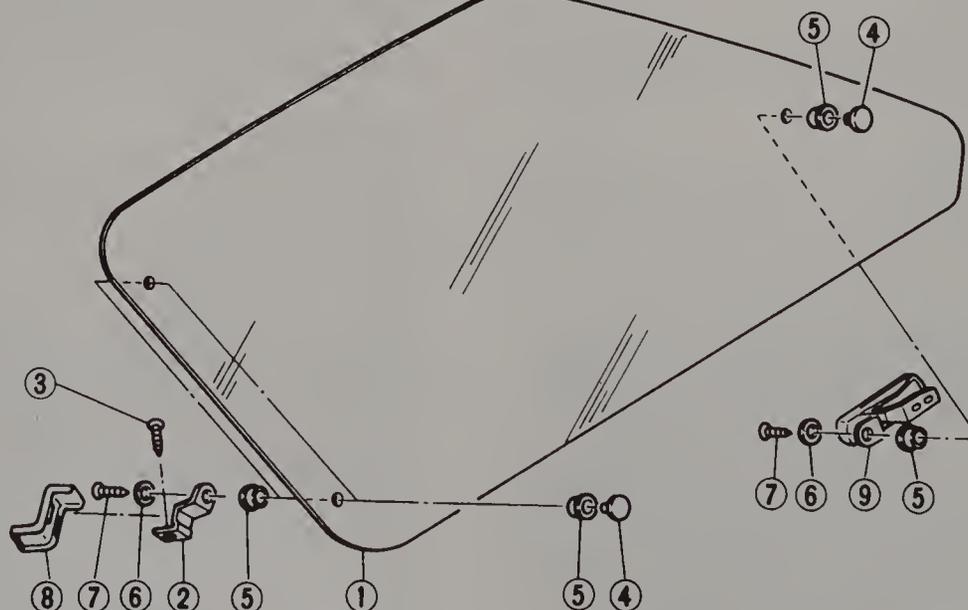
Hatchback side window components – exploded view (Sec 10)
